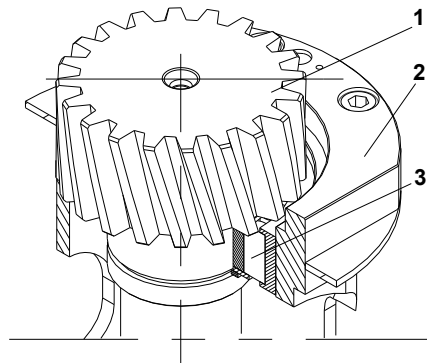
Pinion that engages with the toothed gear in vertical lathes
